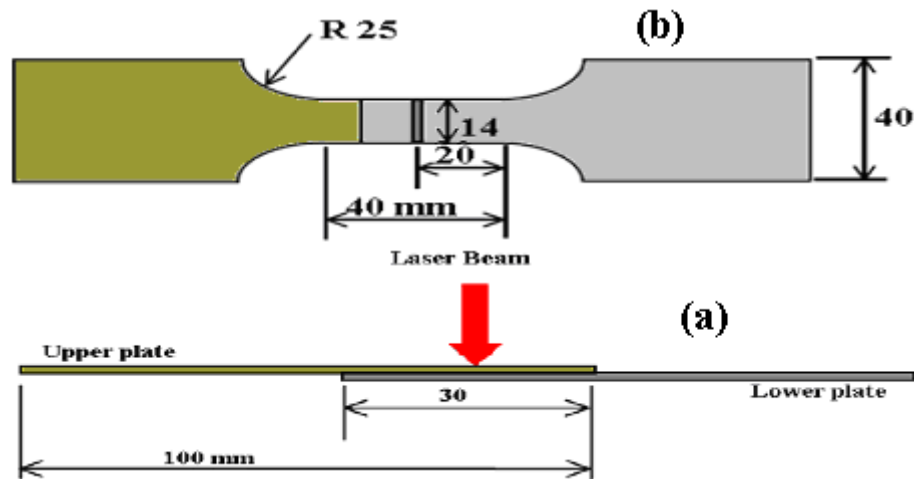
Schematic diagram illustrating the (a) Center-line welding lap-joint, (b) Tensile shear sample[169].
